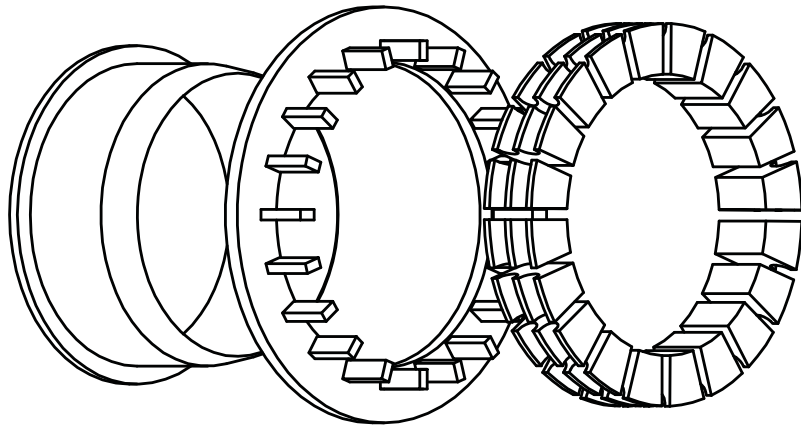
The mounting device used for the segmented ring. From left to right: Sleeve, spacer and segmented ring.
